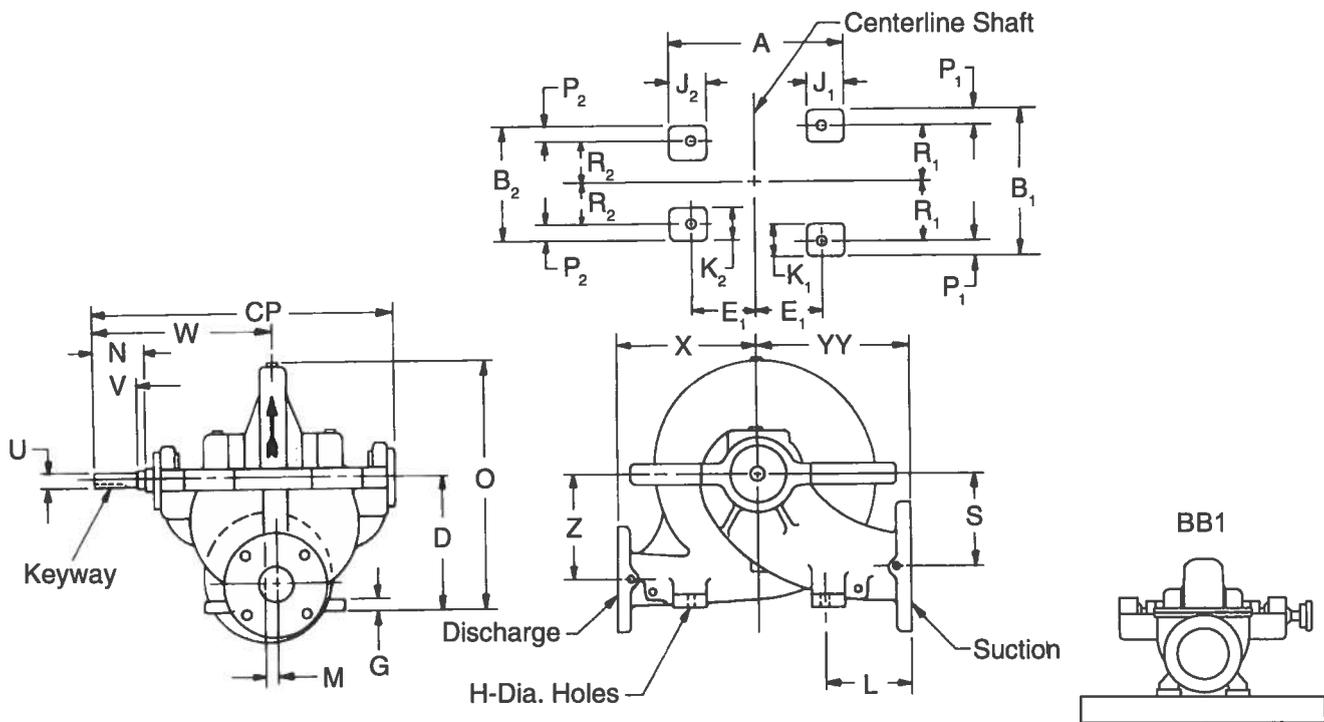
Impeller between bearings – flexibly coupled – single stage – axial (horizontal) split case
